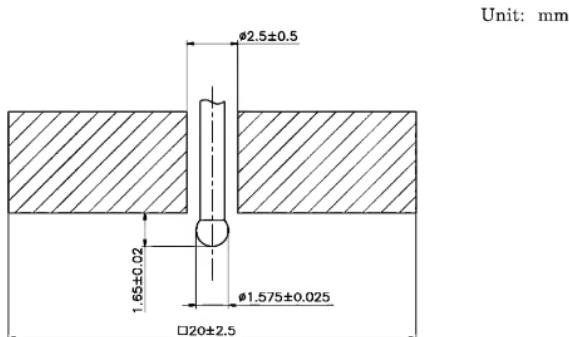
Shape and dimensions of indentor of IRHD pocket meter
